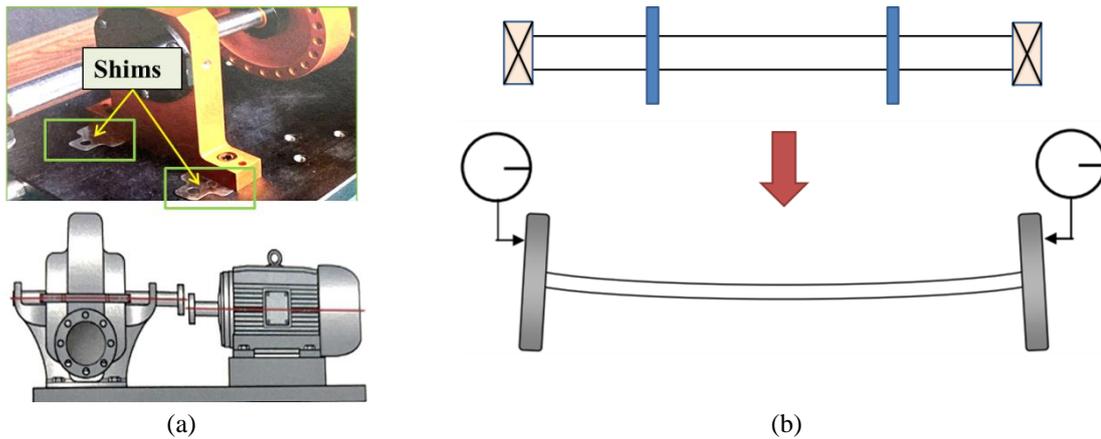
Various faults in the rotating shaft-disc assembly (a) misalignment (b) bent shaft.
